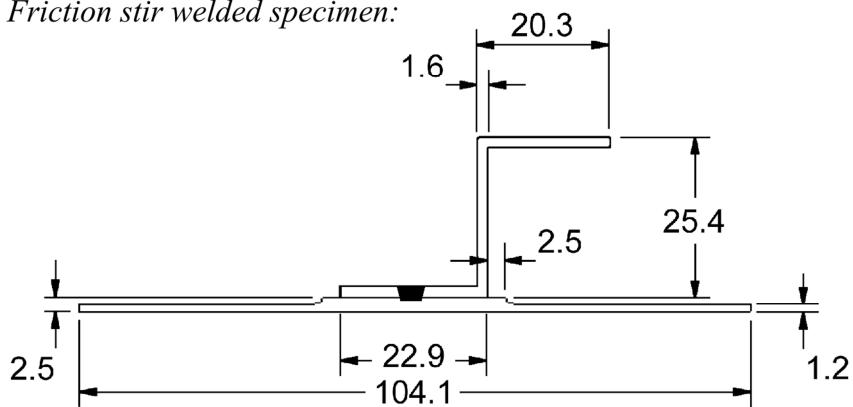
Crippling specimen geometry (All dimensions in millimetres).
